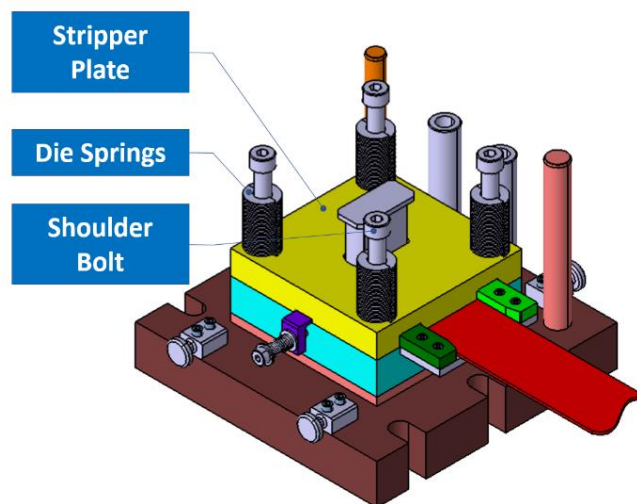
Stripper Plate, Stripper Springs, and Shoulder Bolt
